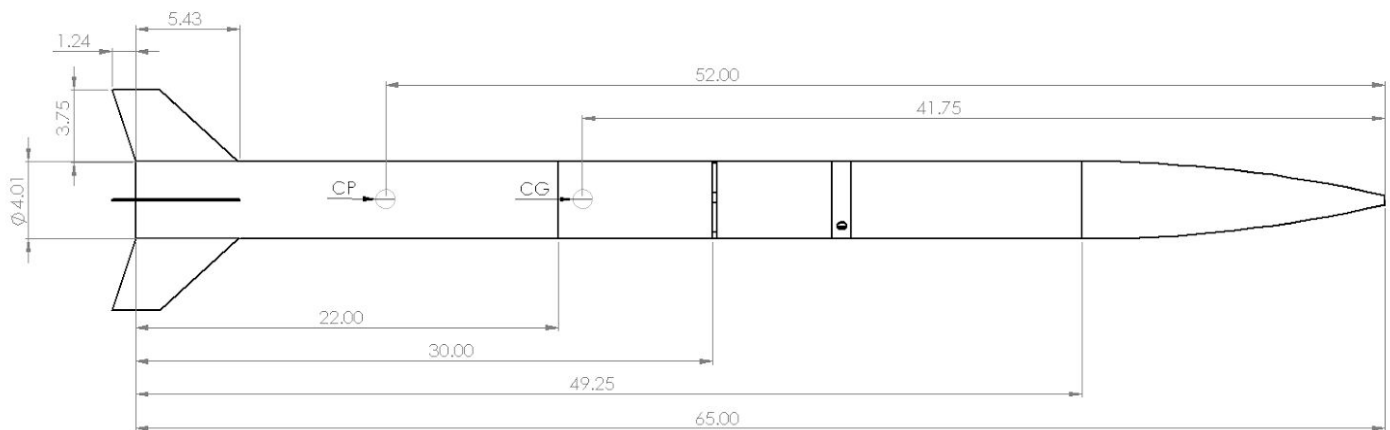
CAD drawing of the rocket with relevant dimensions, CP, and CG marked
